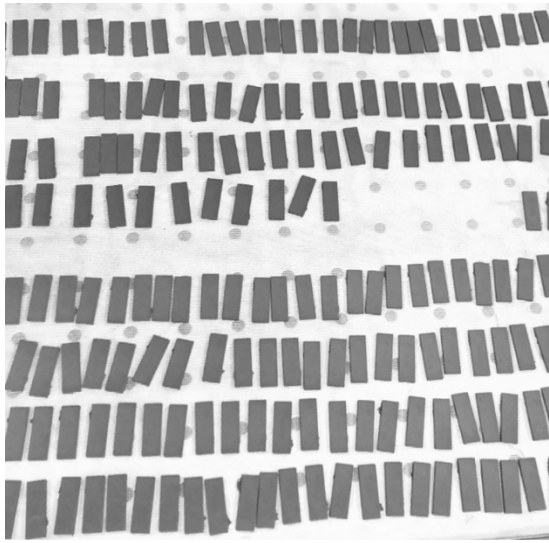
Surface condition of the molded parts after solvent debinding and thermal debinding. No defects can be found in any molded parts.
